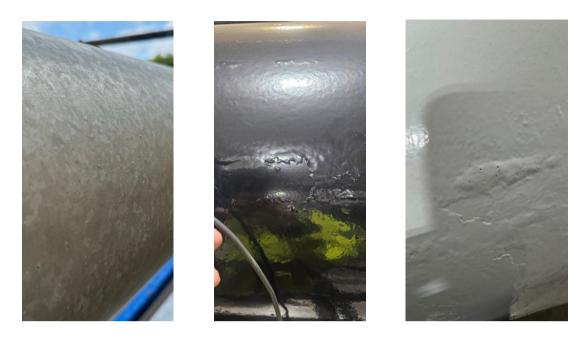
Unacceptable hot-dip galvanizing surface preparation.
